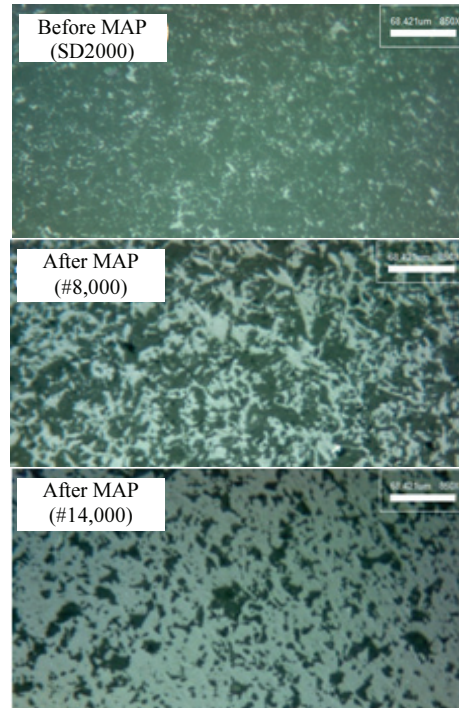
Comparison of the surfaces before and after magnetic assisted polishing for ELID ground workpiece using grinding wheel of grit no. 2000
